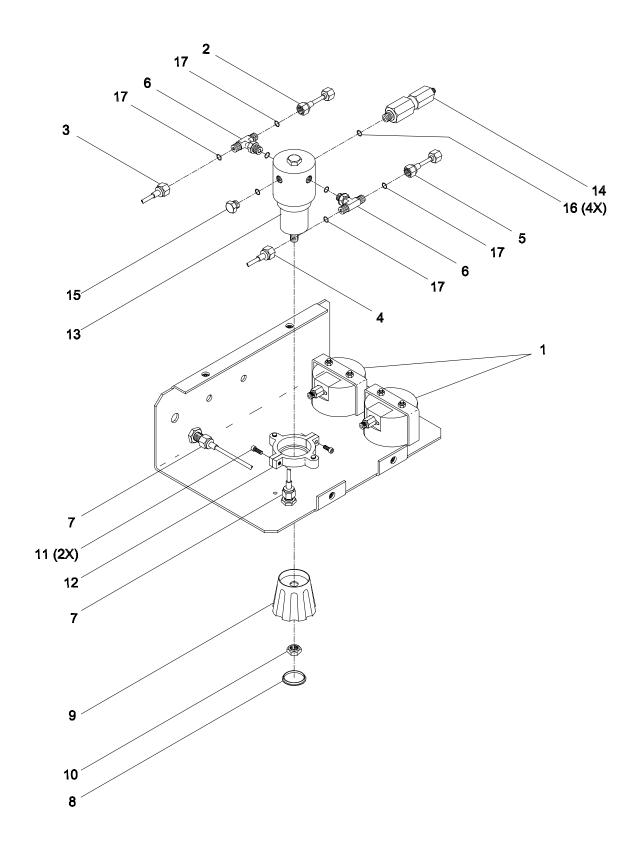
Regulator and Relief Valve Removal and Replacement
